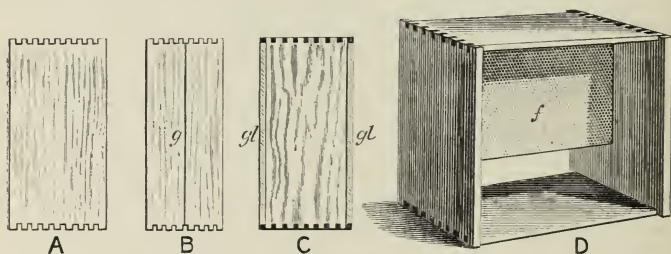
ROOT'S DOVETAILED SECTION BOX.
